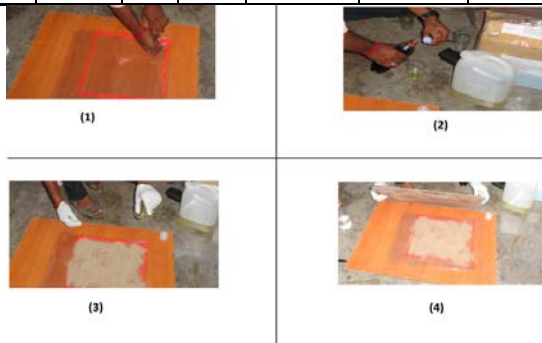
Shows the hand lay-up technique (1) Placing the bottom mould plate with silicon
